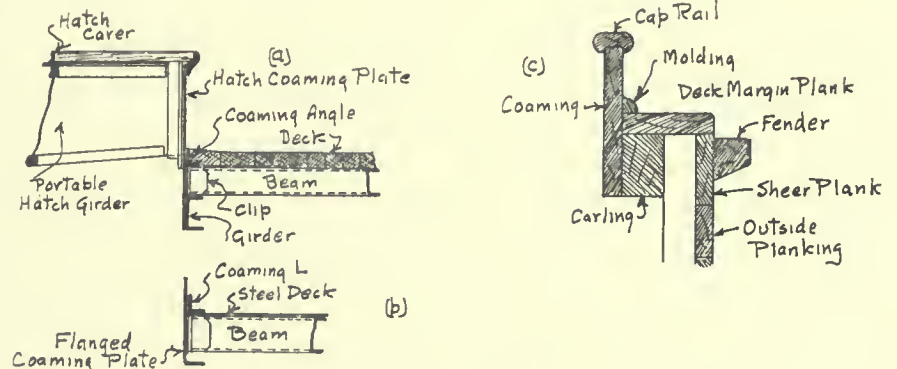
HATCH AND COCKPIT COAMING CONSTRUCTION
